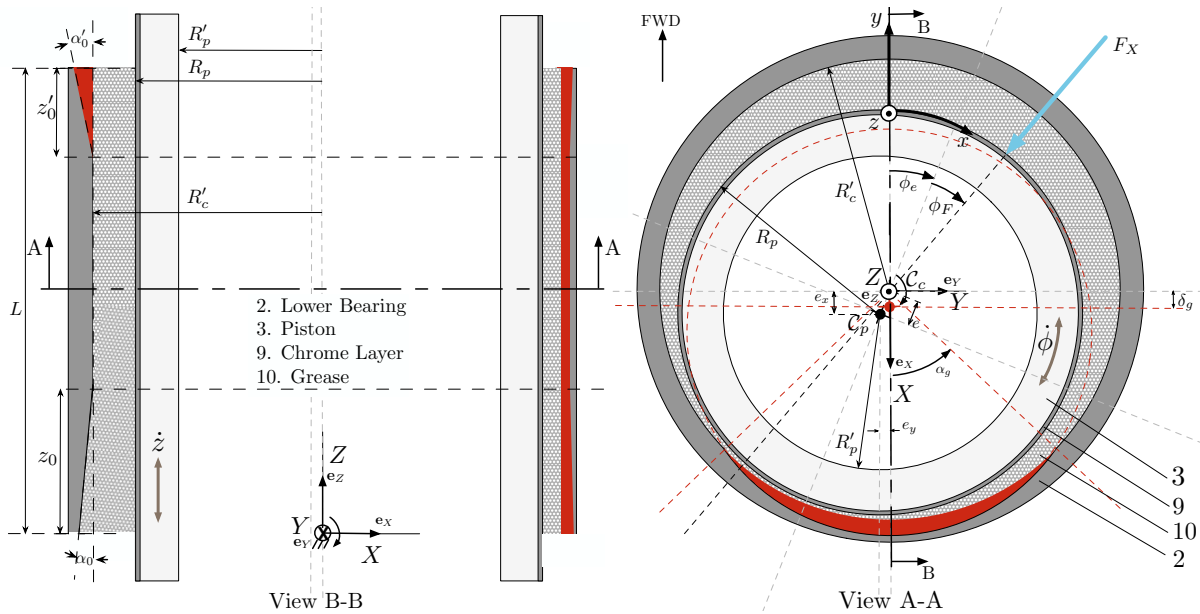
Parametric bearing shape (highlighted areas represent physical removal of material).
